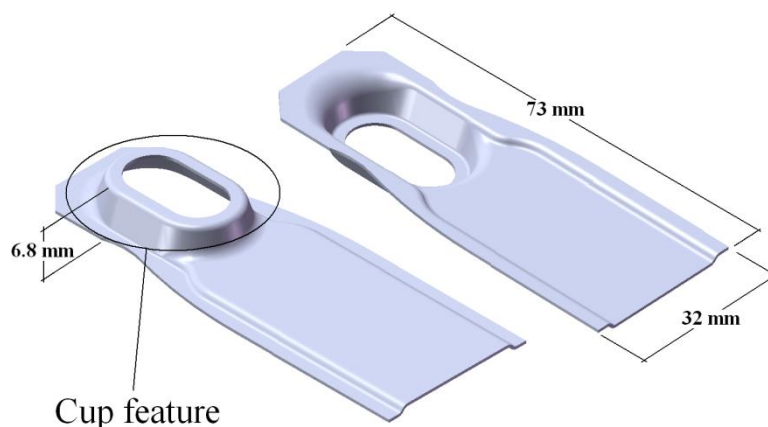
Schematic view of a simplified heat exchanger plate component incorporating the cup shape feature at the end. These plates are stacked and brazed together to form the manifold and fluid channel of an automotive heat exchanger
